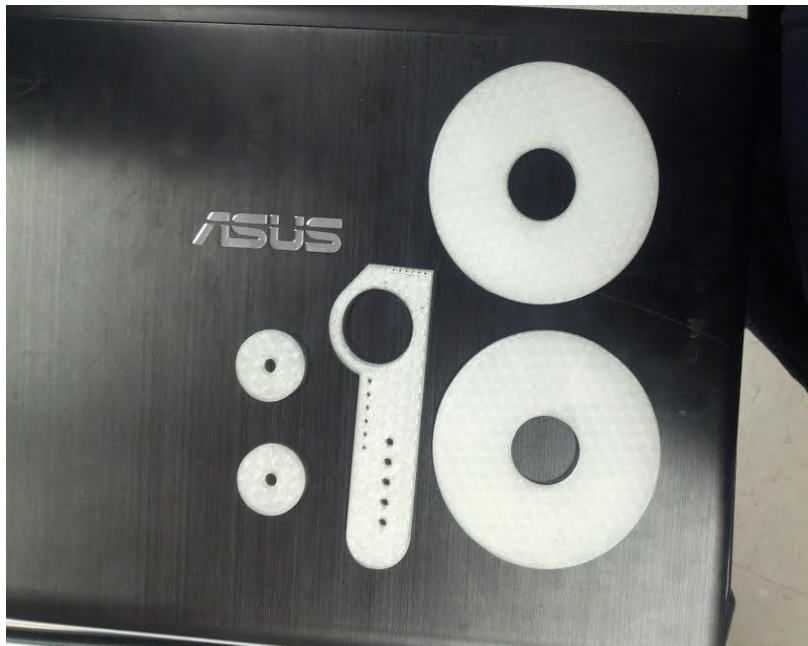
The chassis and wheels after coming out of the 3-D printer. The tolerance for the printer was.. .10", while a lot of the dimensions of our pieces fell in the .125" range, so we were very nervous about the tolerances of the pieces when the combined.
